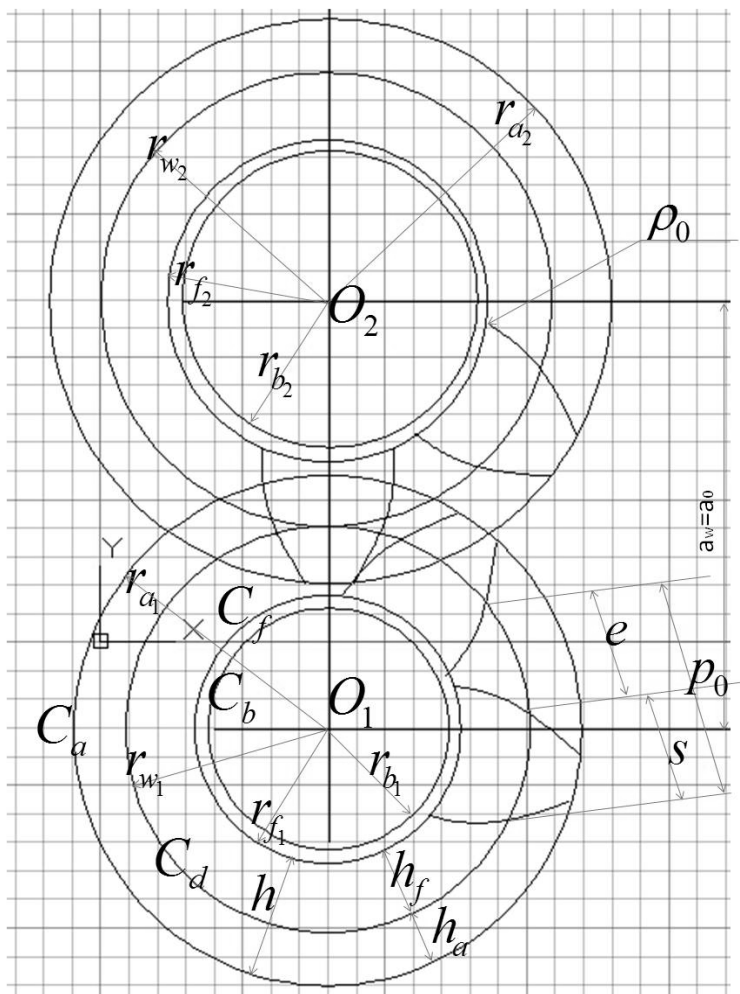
The geometrical elements of a straight toothed gear; head, root and division circles; circular step
